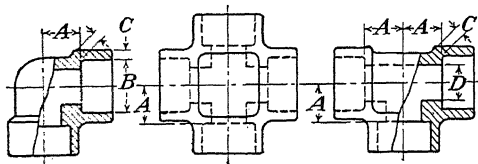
Minimum requirements for socket and fillet-weld dimensions.
